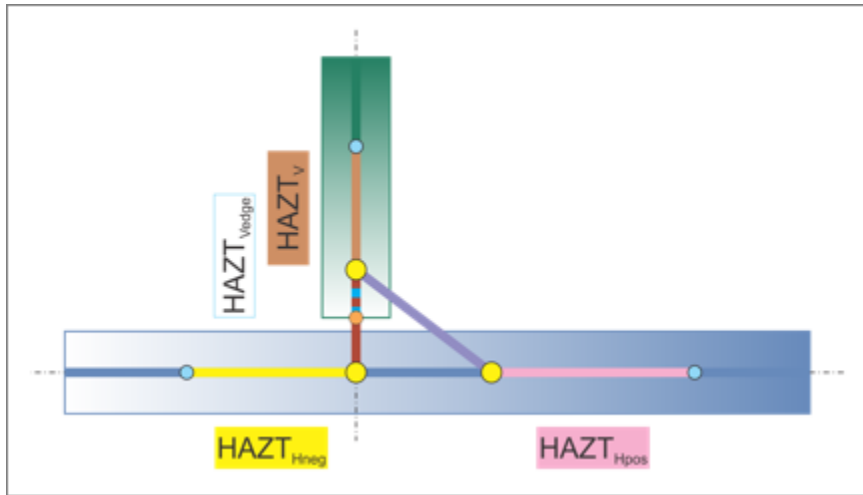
Vertical and Angled T Weld HAZ
